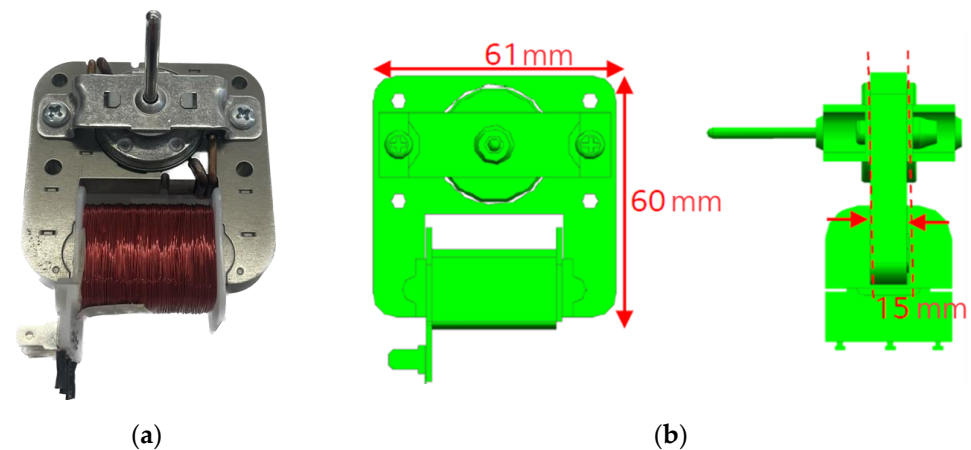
Existing cooling fan motor (SPIM): (a) cooling fan motor (SPIM); and (b) cooling fan motor (SPIM) size.
